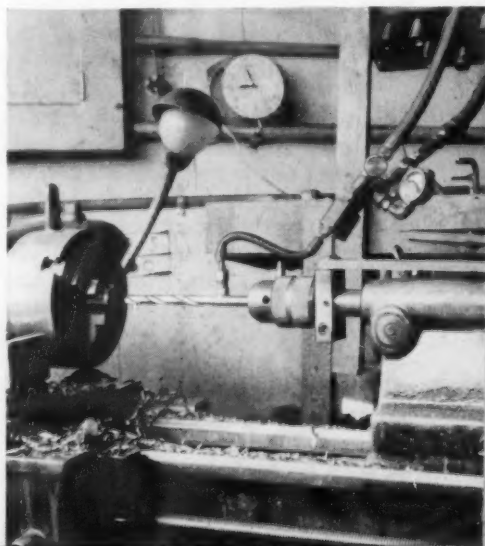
For this deep-hole drilling operation, a core drill is used and the cutting fluid forced in the hole under pressure
